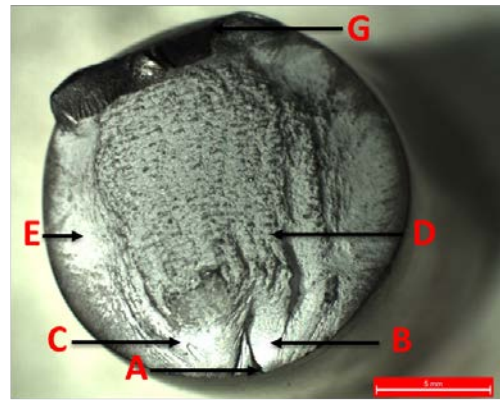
Fractograph of T6/Polished Test Specimen 4
